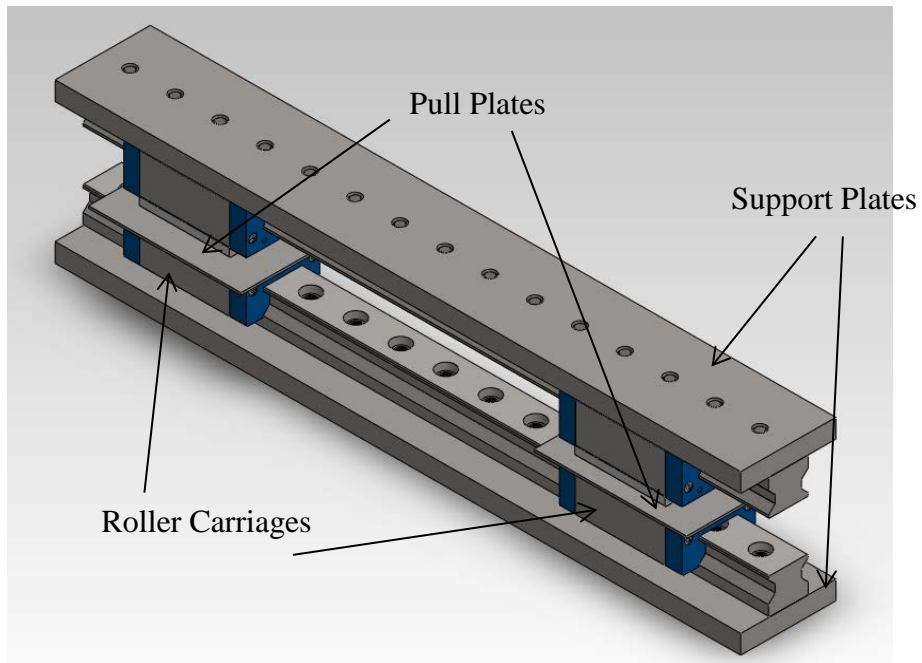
CAD Model of Roller Carriage Testing Assembly
